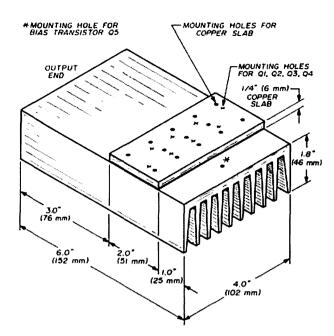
Heatsink and copper slab hole patterns. The heatsink is a Thermalloy 6157 or similar. All holes in the copper are drilled to pass a 4-40 screw; all holes in the aluminum are drilled and tapped for 4-40 screws. The printed-circuit mounting holes should be located after the PC board is drilled.
